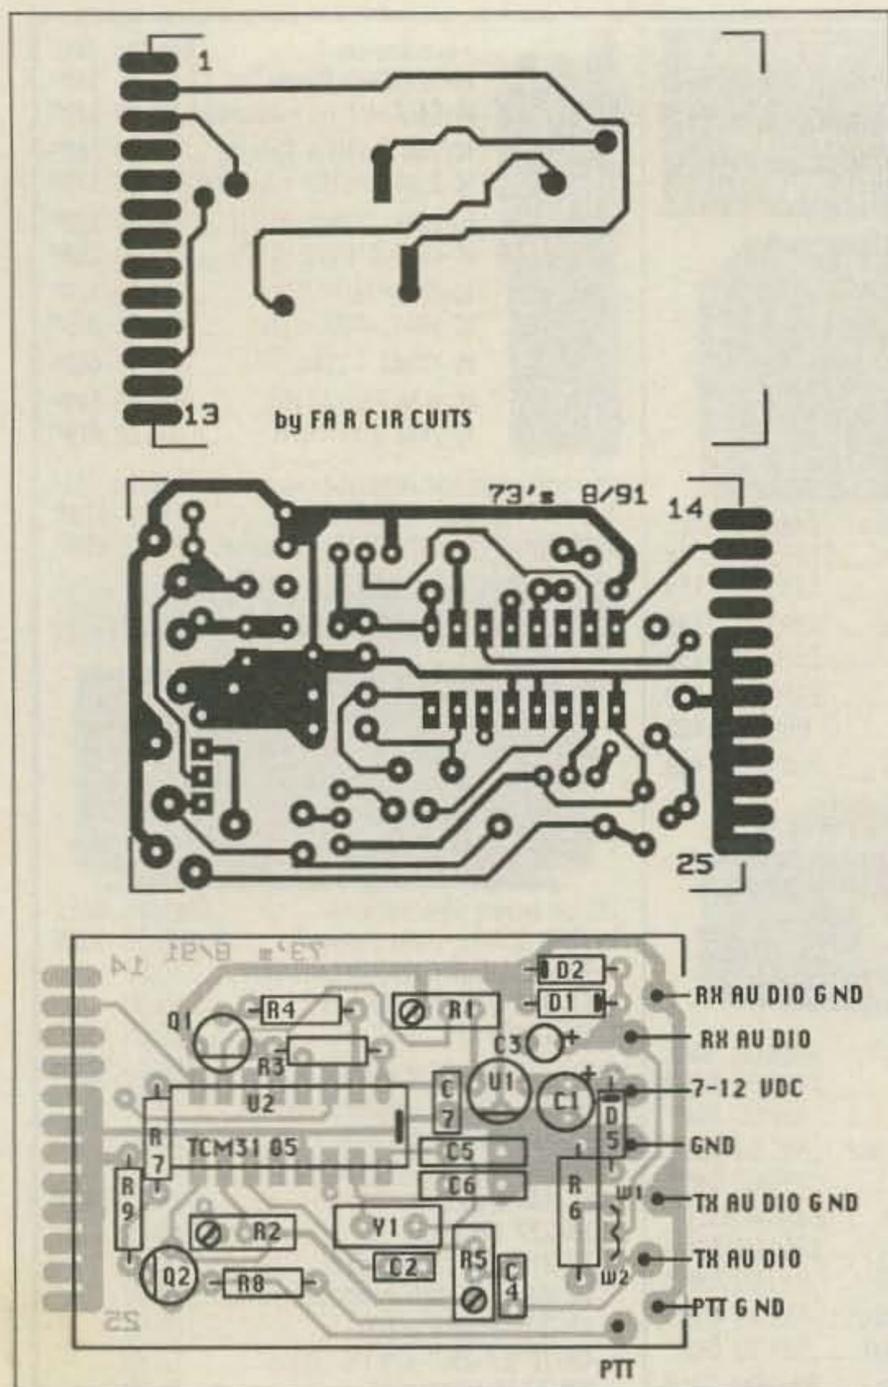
PC board foil pattern for the laptop interface. (a) Top layer (solder the top pads as well as on the bottom). (b) Bottom layer. (c) Parts placement.
